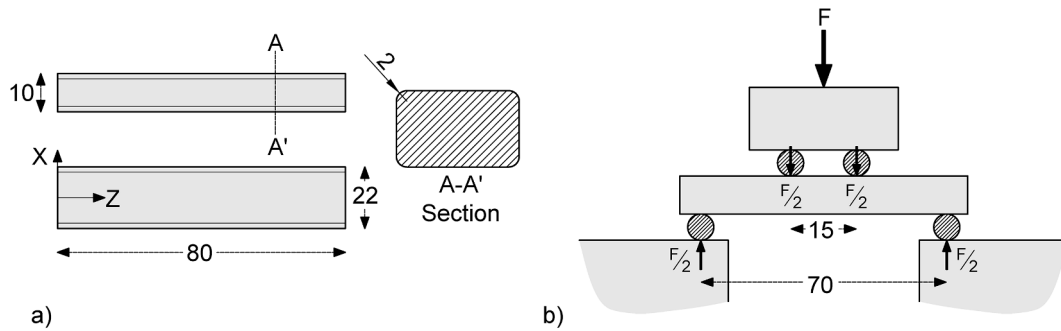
a) Geometry of test specimens and b) scheme of the 4-point bending test setup. All dimensions are given in mm.
